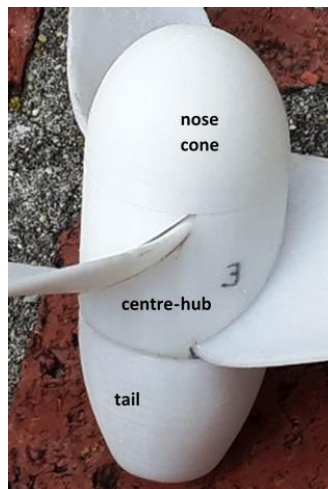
The 5-component hub assembly for the rotors designed with the standard BEMM (re-using the 5% rotor blades each time)
